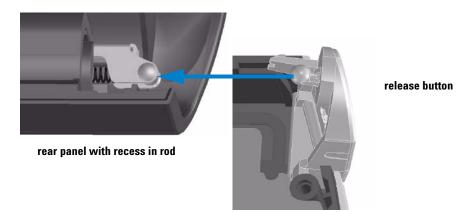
Pin of release button fits into the recess of the rod (OLD rear panel design)
